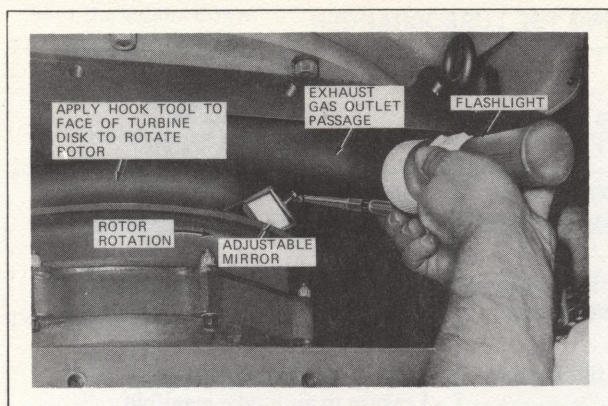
INSPECTING TURBINE-BUCKET BLADES.
